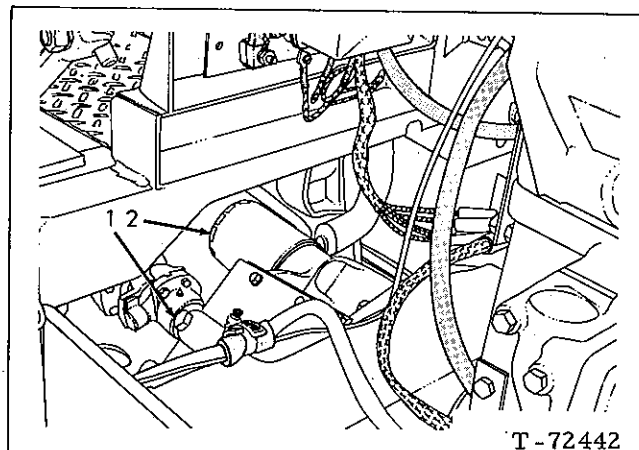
ENGINE CLUTCH OIL FILTER AND BREATHER
